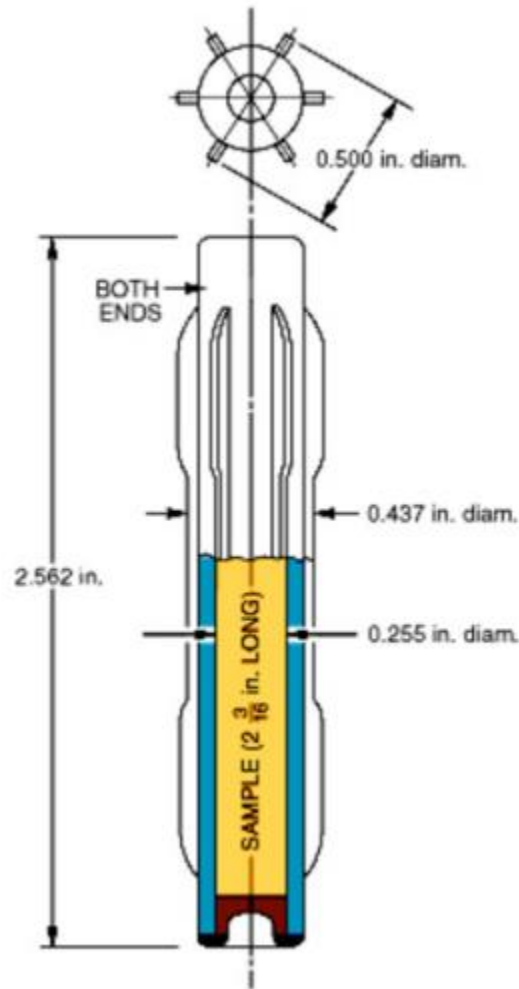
HFIR Hydraulic Tube Dimensions [6].
